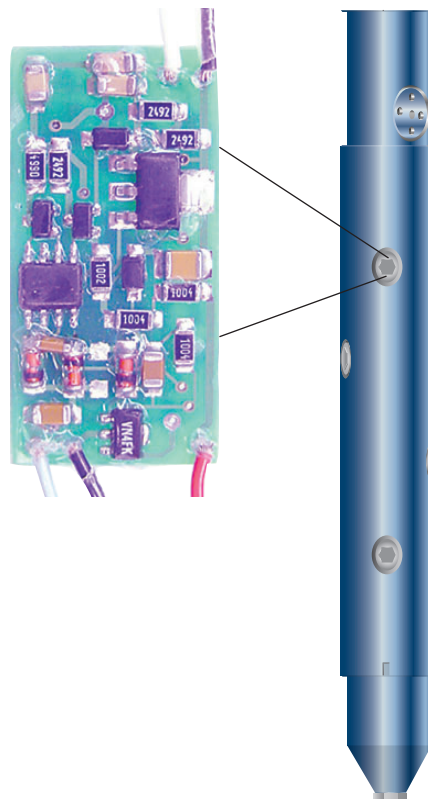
Switch and gun of the ASFS addressable-switch firing system.
